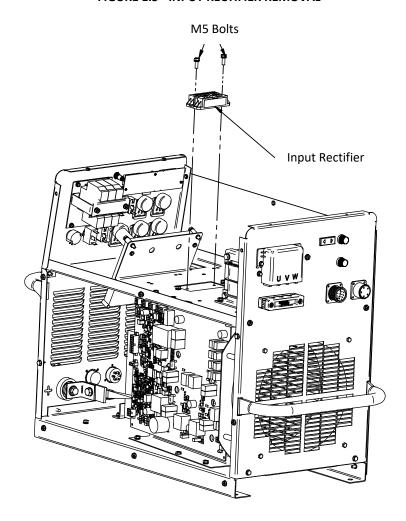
INPUT RECTIFIER REMOVAL
